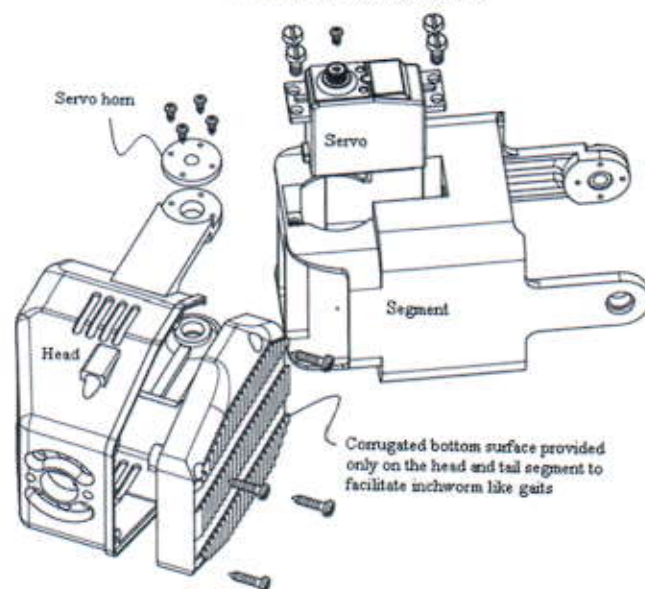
Exploded view of head segment and servo location. Alternate joints are orthogonal
